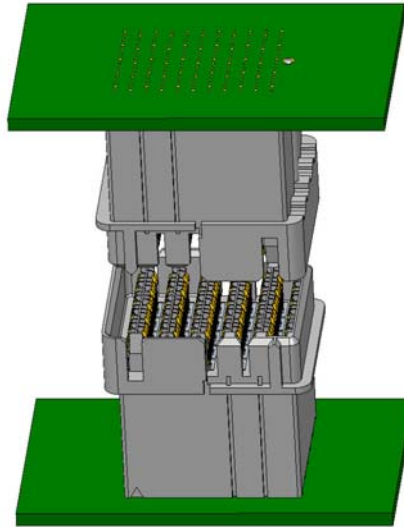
ExaMEZZ Hermaphroditic Connector Assembly (4 Pair, 2mm Pitch, 11 column shown)
